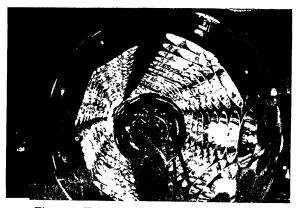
Tunnel-type oven for steering-wheels (Ford Motor Co.)
